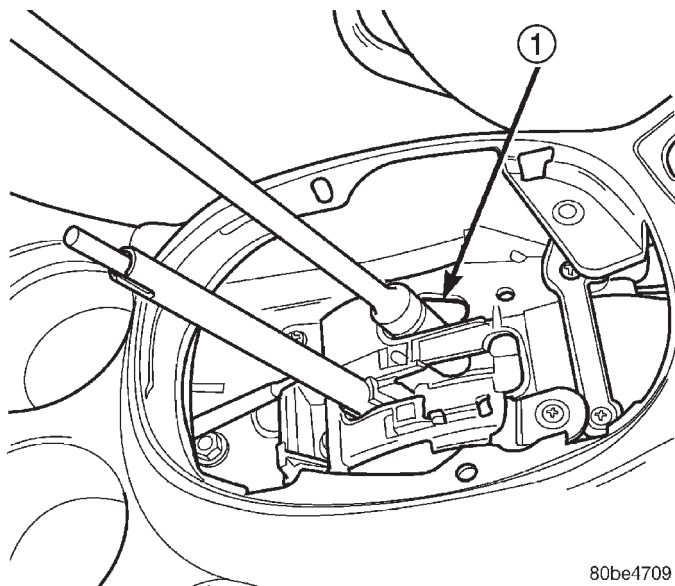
Shift Cable Adjust Lever Nut—Typical
